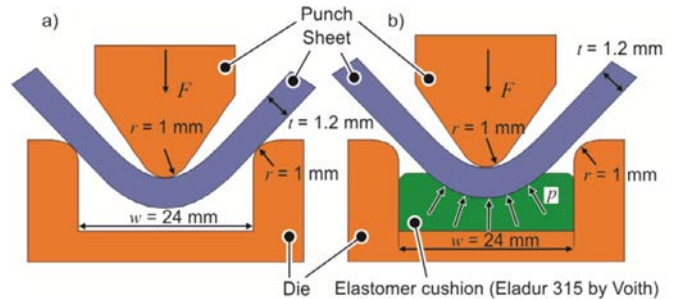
a) Air bending and b) bending with an elastomer tool, [198].
